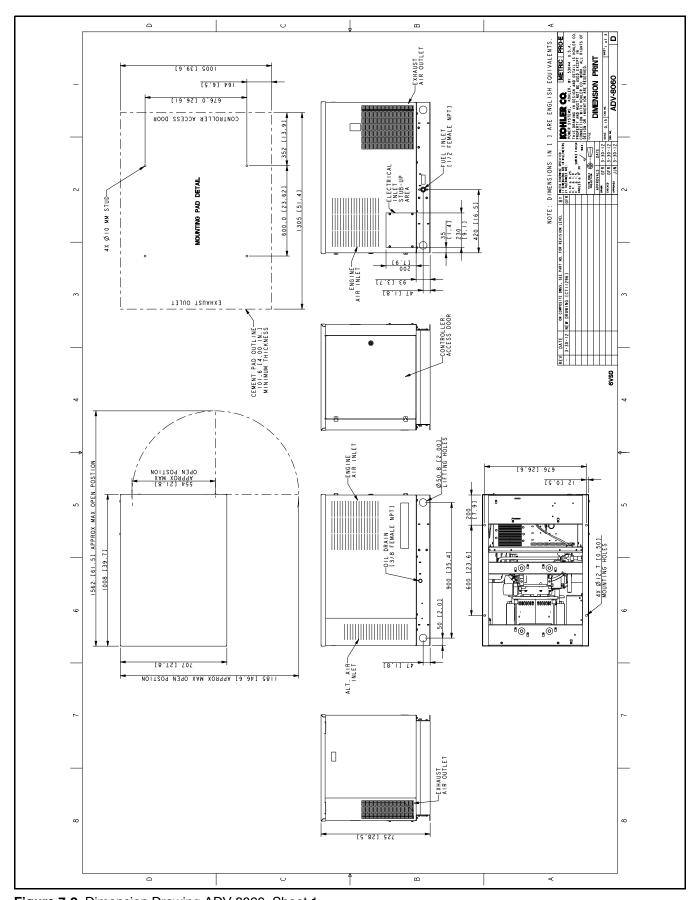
Dimension Drawing ADV-8060, Sheet 1
